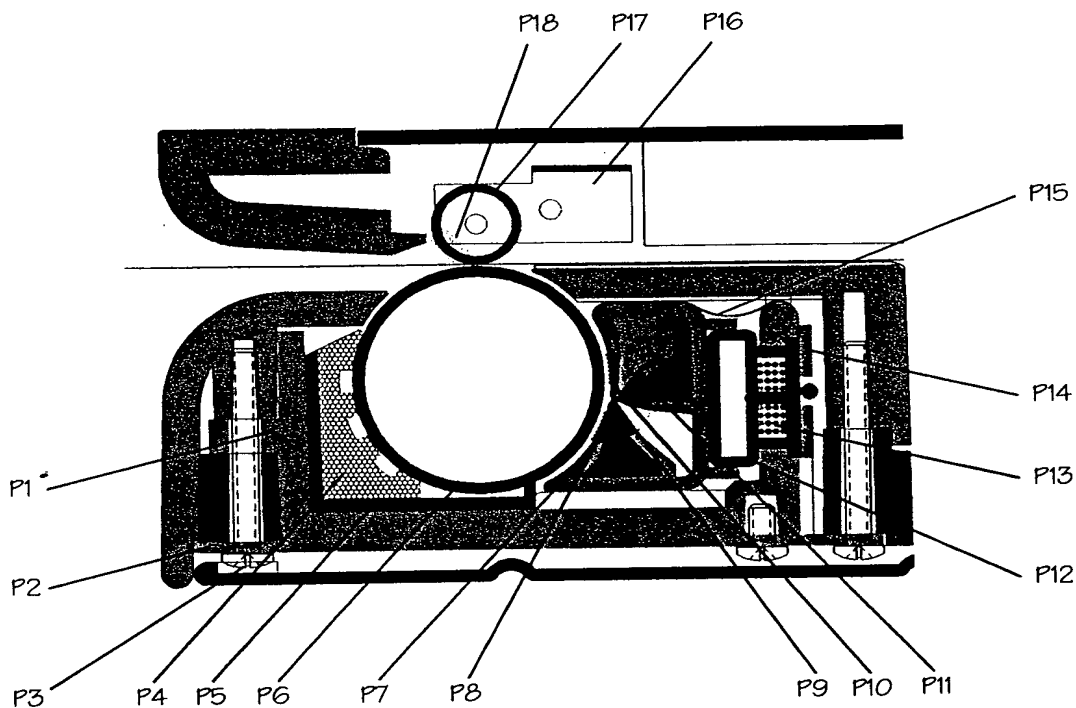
Cross-section of printhead assembly and image transfer mechanism, with part references
